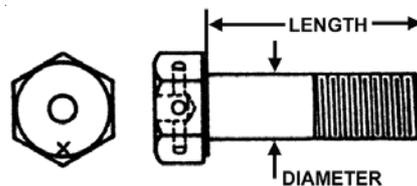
, MS20073 - MS20074 Drilled Head Bolts.
